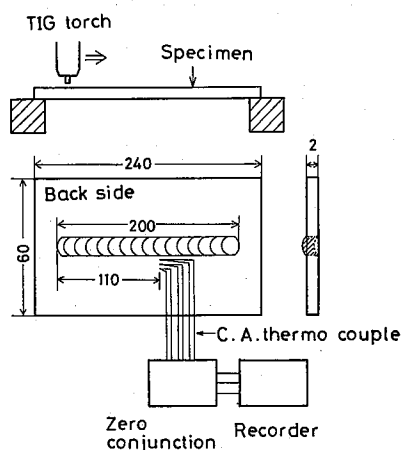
Experimental method for TIG arc welding (Schematic)
